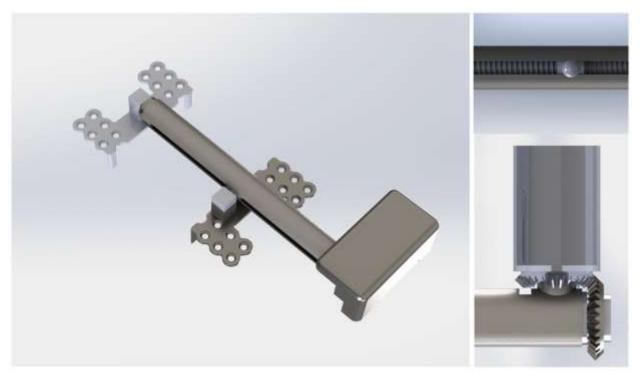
CAD rendering of final design of cranial distraction device (left). The drive mechanism is a lead screw (top right) that is driven by a bevel gear design (bottom right), with a magnet attached to the exterior gear. The magnet is actuated by external rotating magnets.
